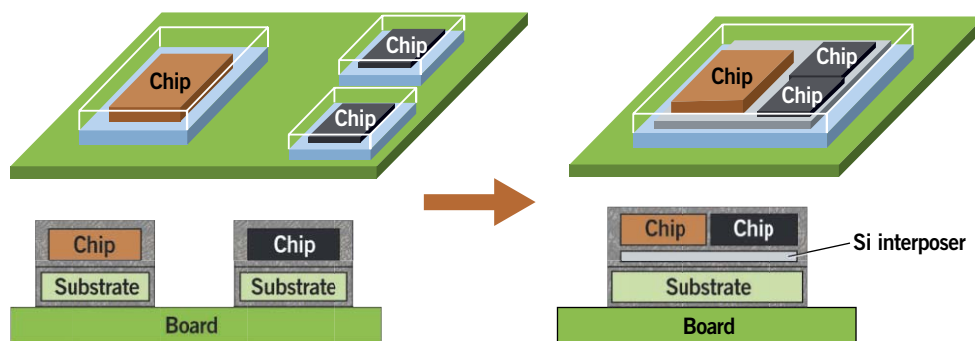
Converging the IC package and system board into a single device package minimizes the number of packages on printed circuit boards.
